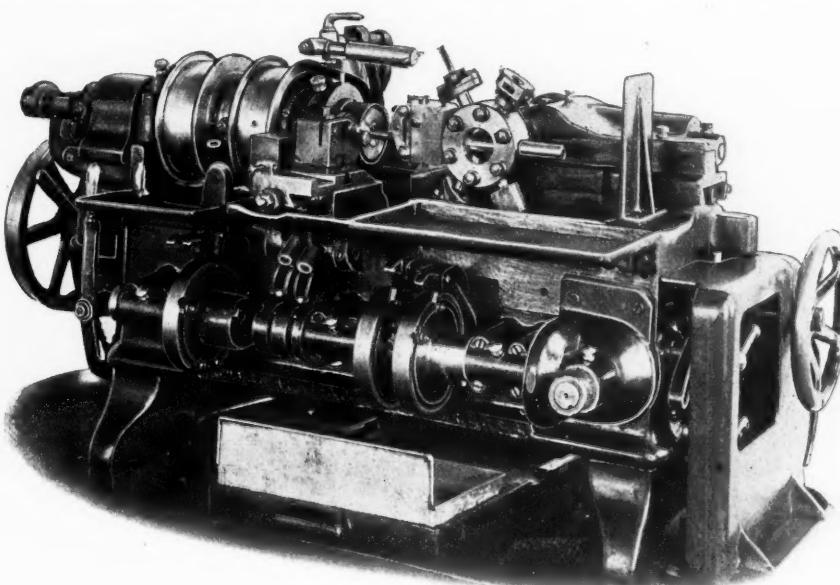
An Automatic Screw Machine, arranged for Gear Cutting.
